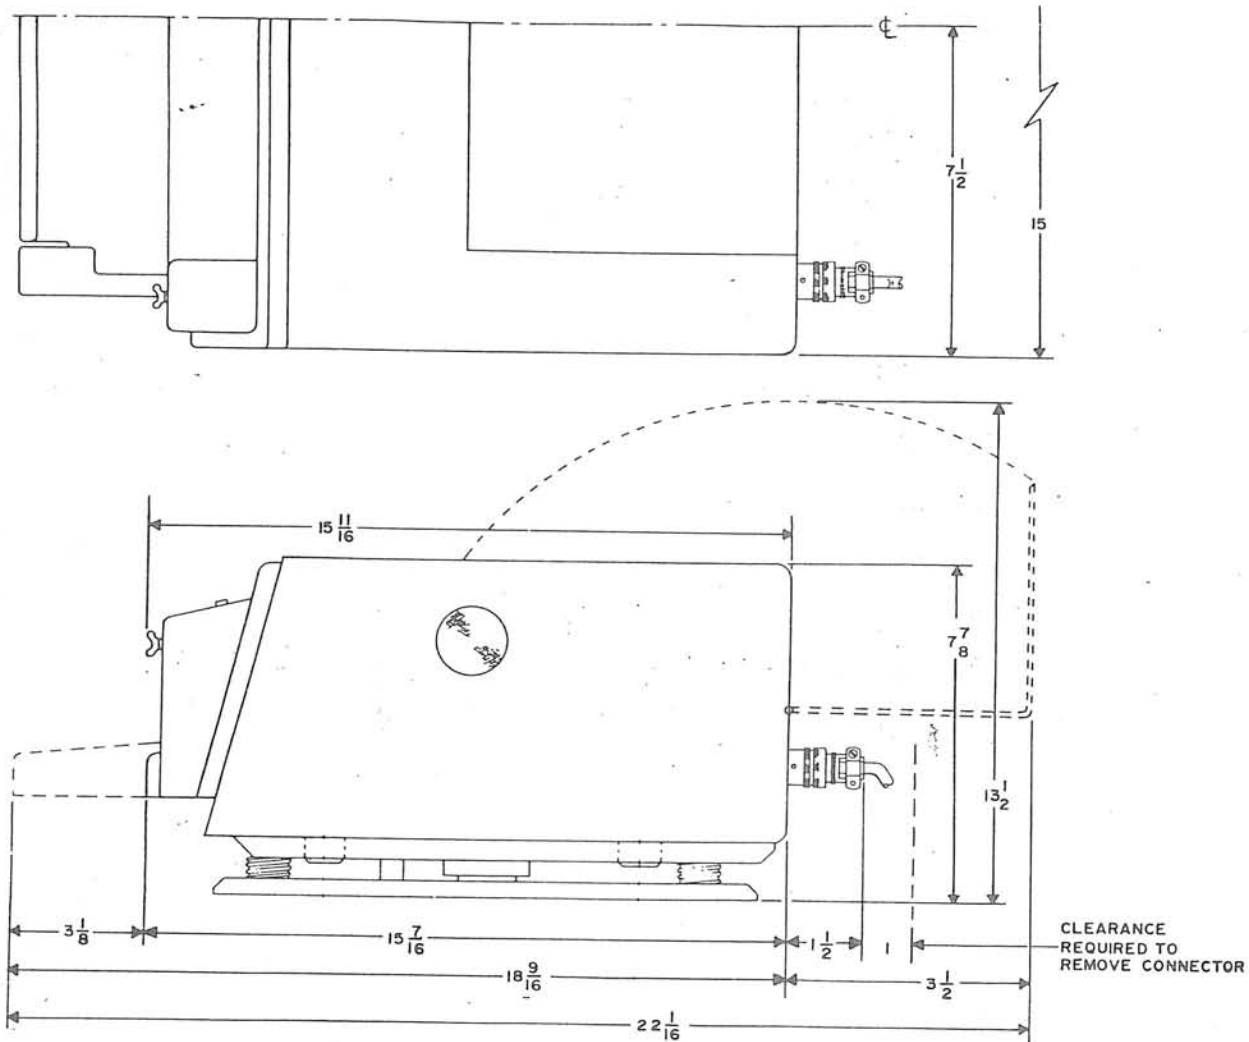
Non-Tactical Case CY-6063/UG (AN/UGC-41) Overall Dimensions
